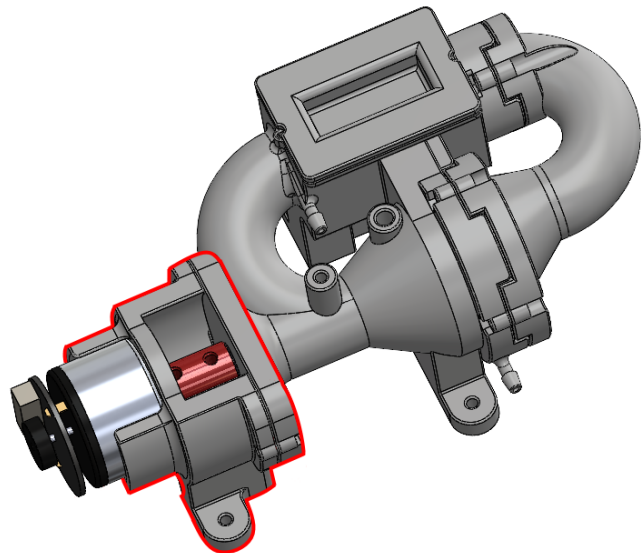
The motor assembly (highlighted in red) fully assembled to the water tunnel.
